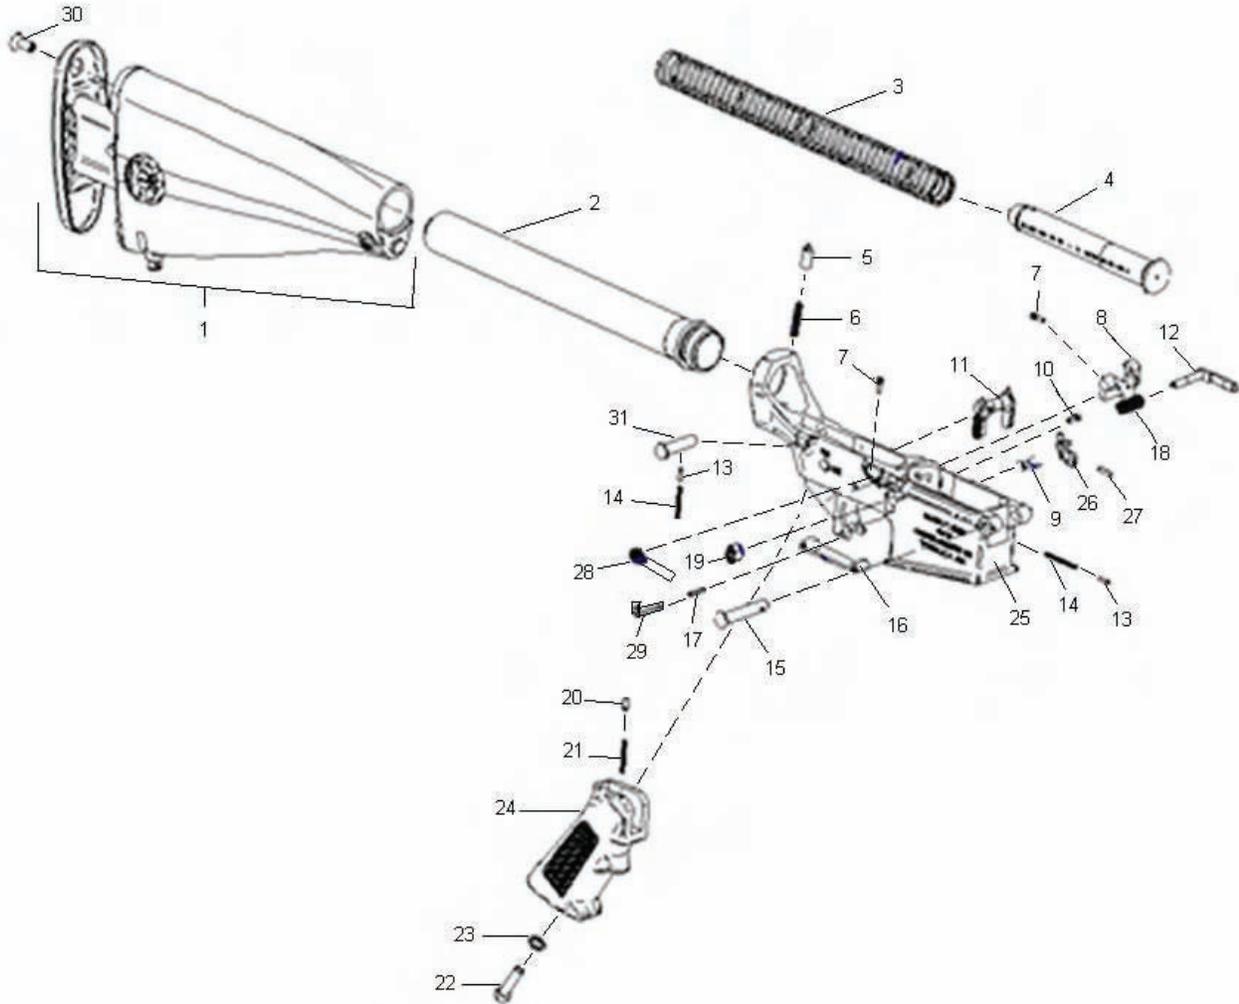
Lower Receiver and Adjustable Buttstock Assembly – PN: 24726
